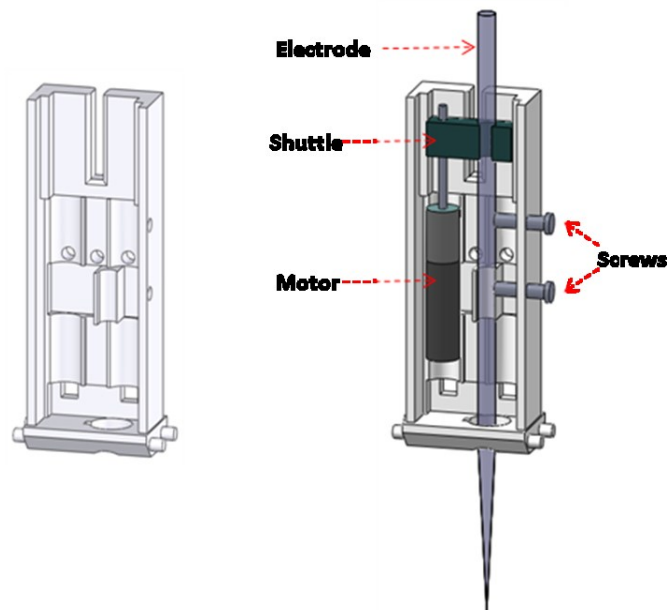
CAD drawings of the microdrive chassis and assembly. (Size of the chassis is $\sim 7 \times 4.5 \times 20 \text{ mm}^3$)
